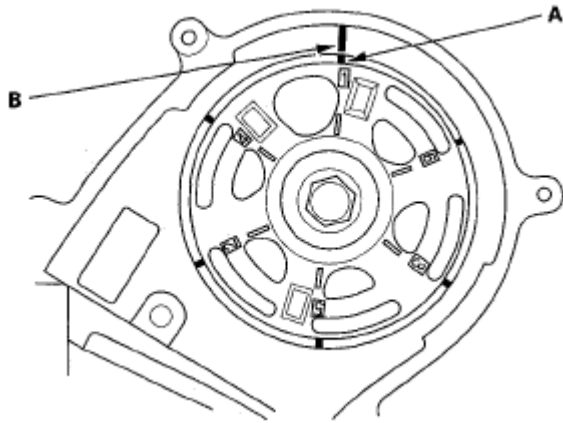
Aligning TDC Marks On Camshaft Pulleys With Pointers - Front
